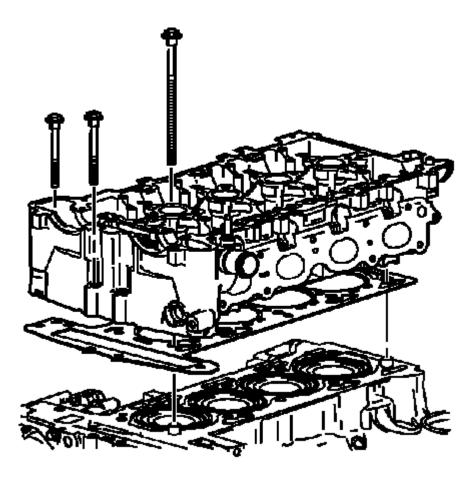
Cylinder Head And Gasket Courtesy of GENERAL MOTORS COMPANY
